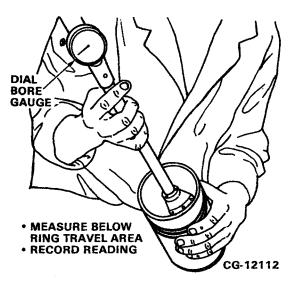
Check Cylinder Sleeve I.D. Below Ring Travel Area
